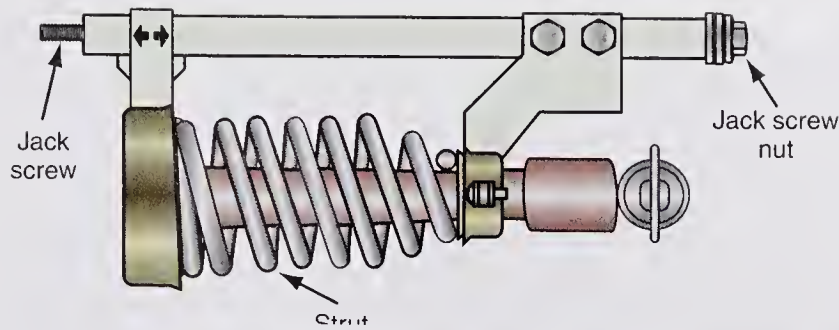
MacPherson strut coil spring compressor tool.
